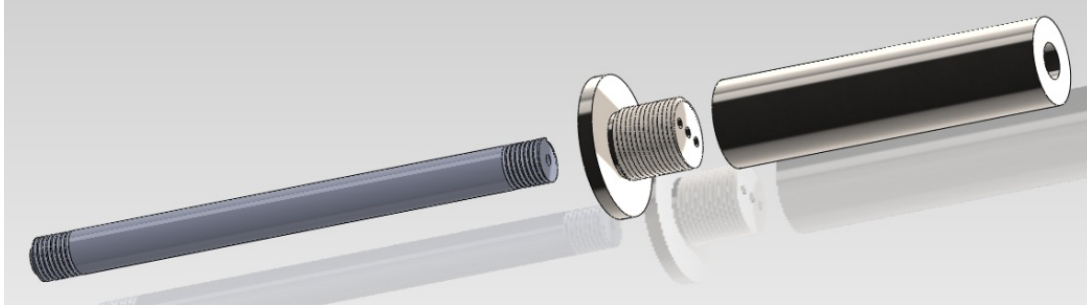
Three Piece Stepped Shaft Design with Spring Retainer
